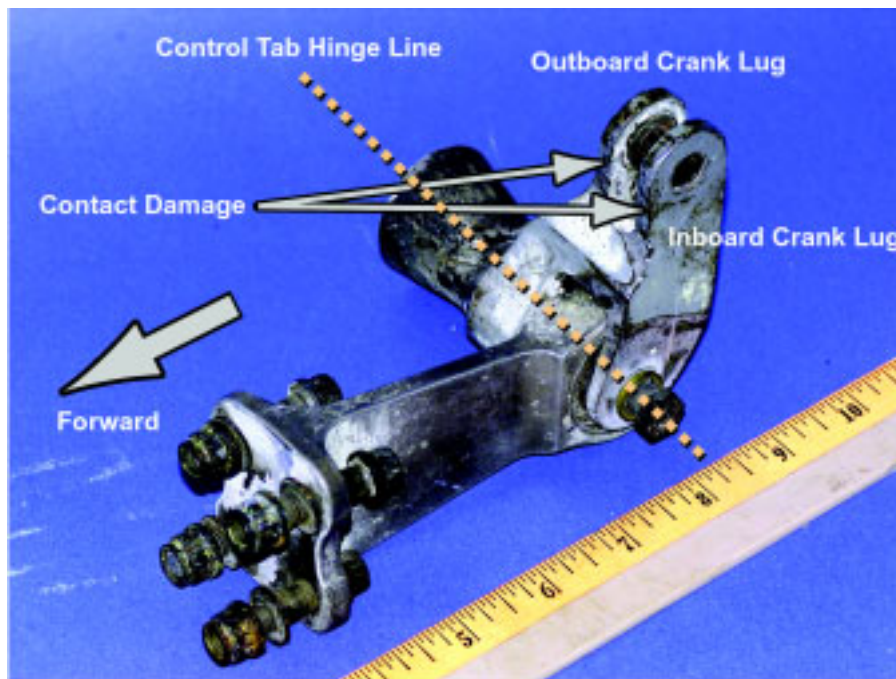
A photograph of the accident airplane's right elevator control tab crank fitting. Note damage on forward face of control tab crank fitting lugs.
